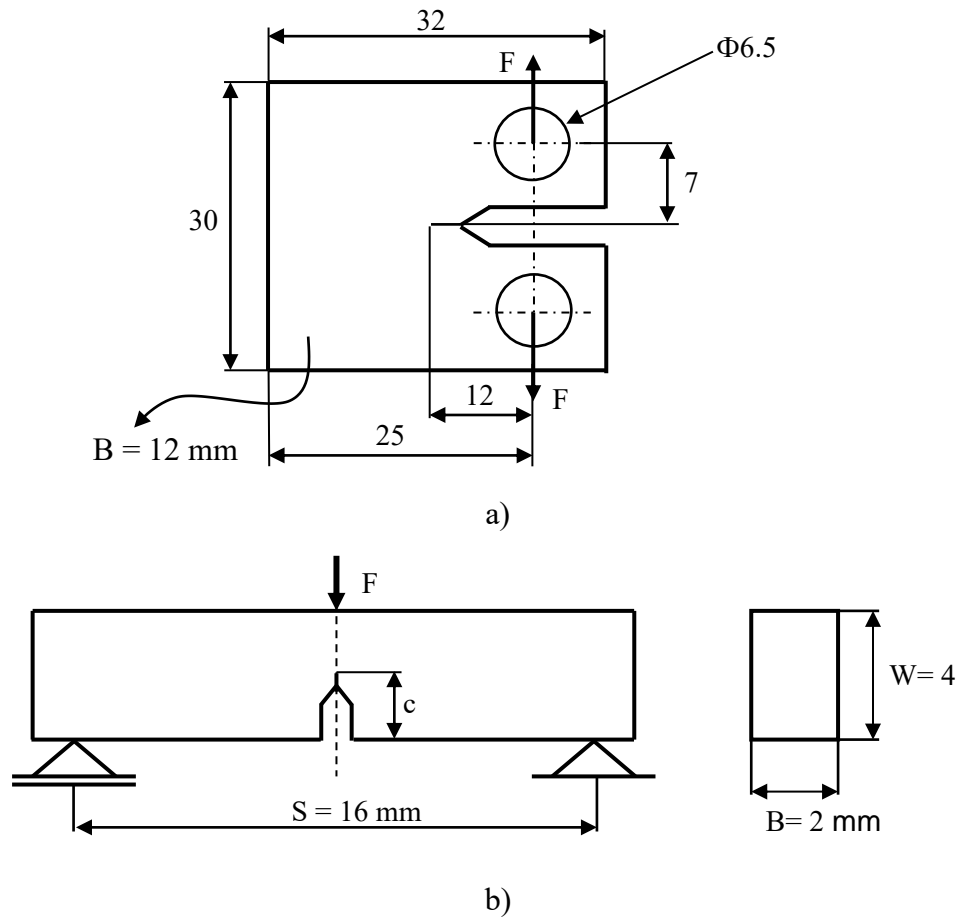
Fracture Mechanics specimens: a) CT specimen; b) SENB specimen
